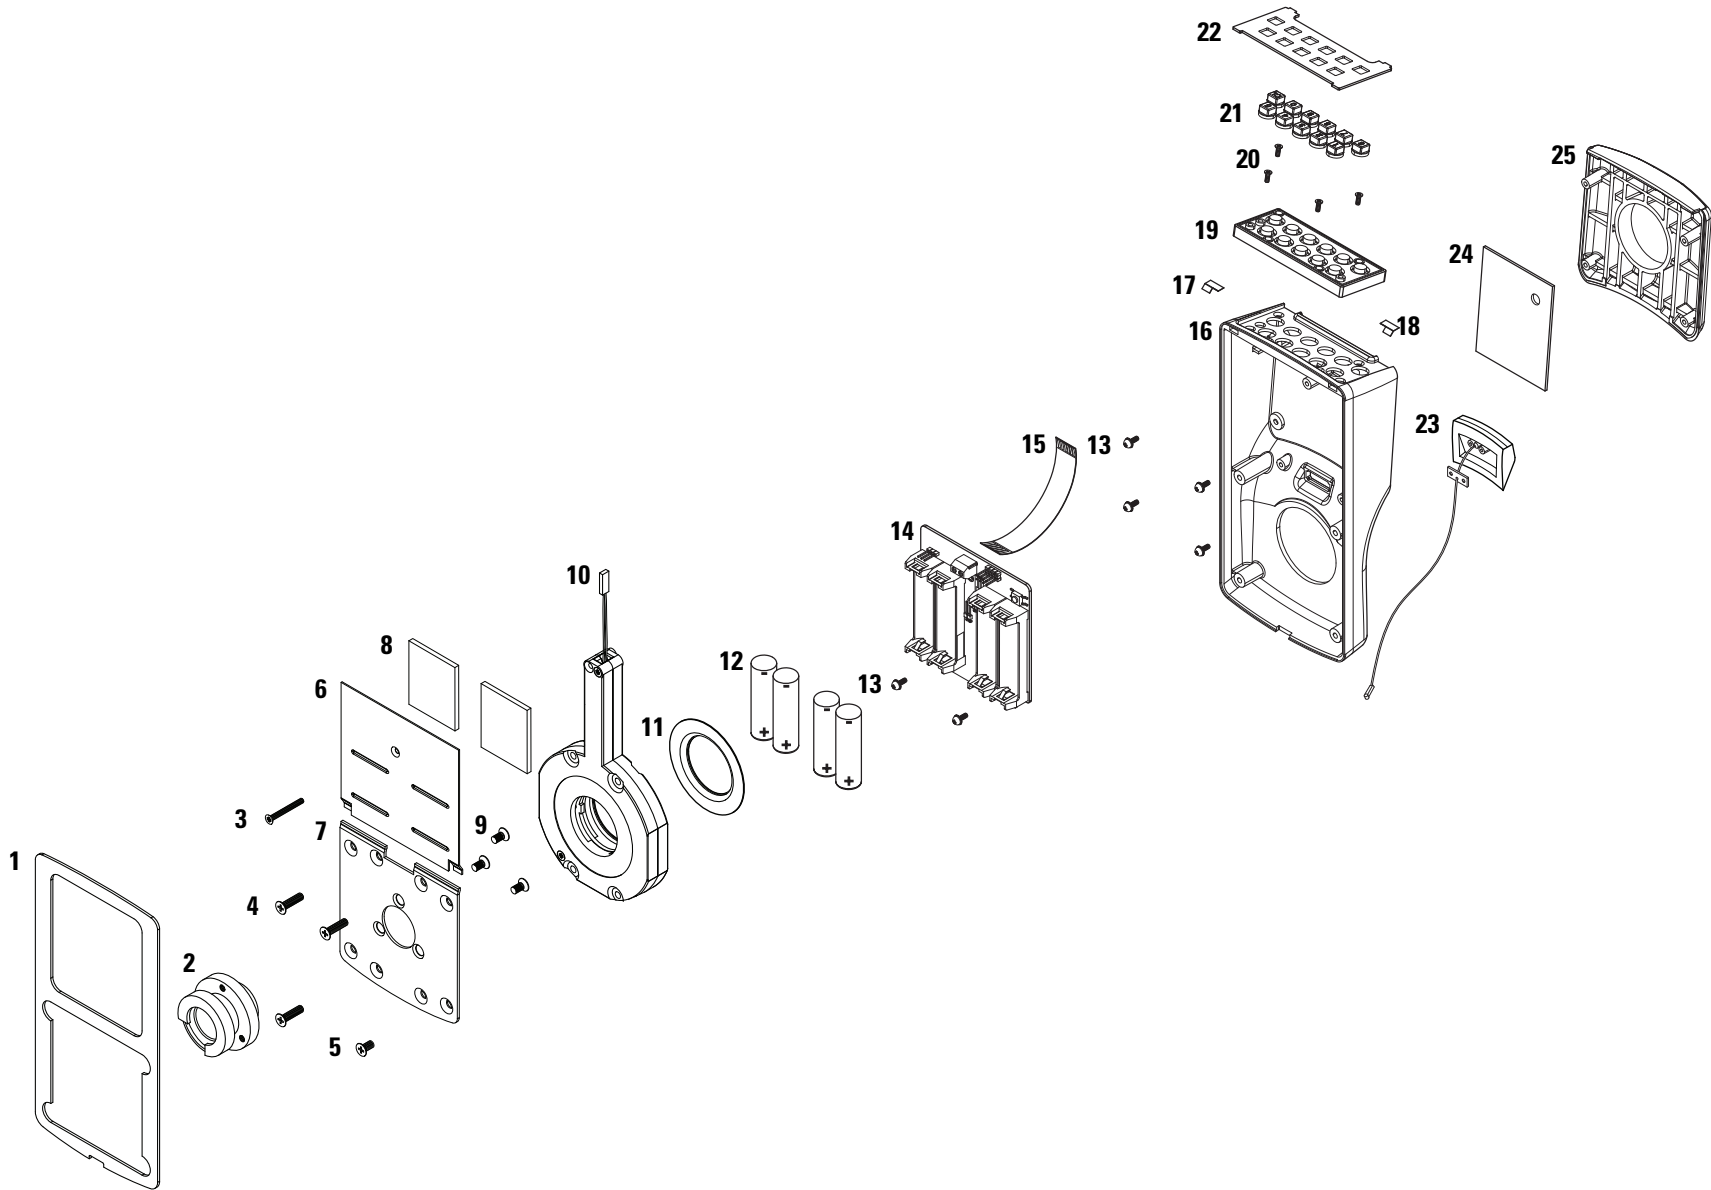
Keypad reader escutcheon assembly (WAMS shown)
